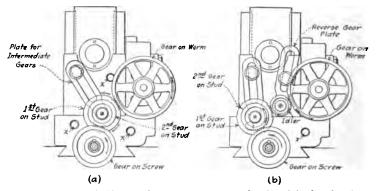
Brown & Sharpe change gears arranged a for right hand spiral, and b with idler introduced for cutting left hand spiral.
